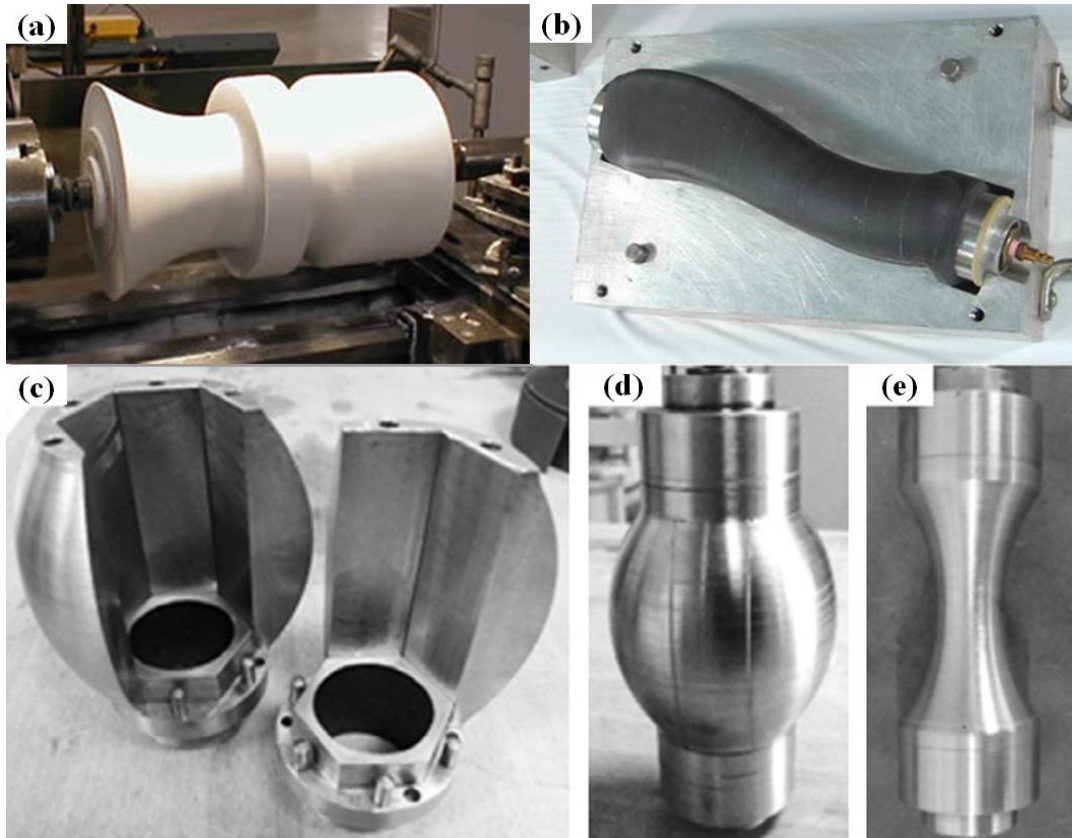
Filament winding mandrel types (a) water-soluble mandrel (b) Rubber bladder mandrel (c) half-assembled segmented mandrel (d) full assembled segmented mandrel (e) Shaft of segmented mandrel (5)
